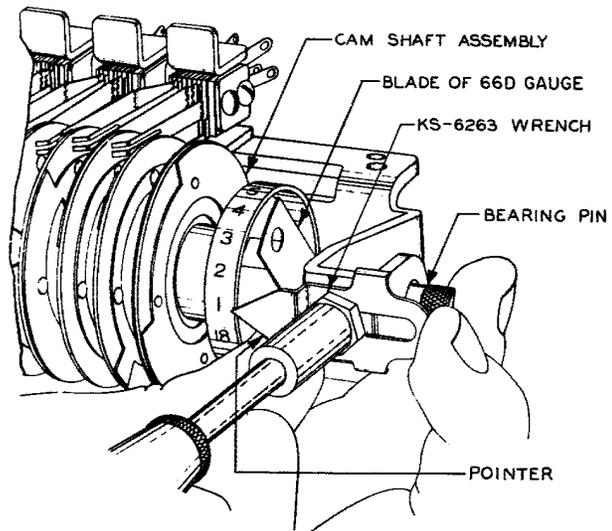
Method of Adjusting Endplay of Cam Shaft
